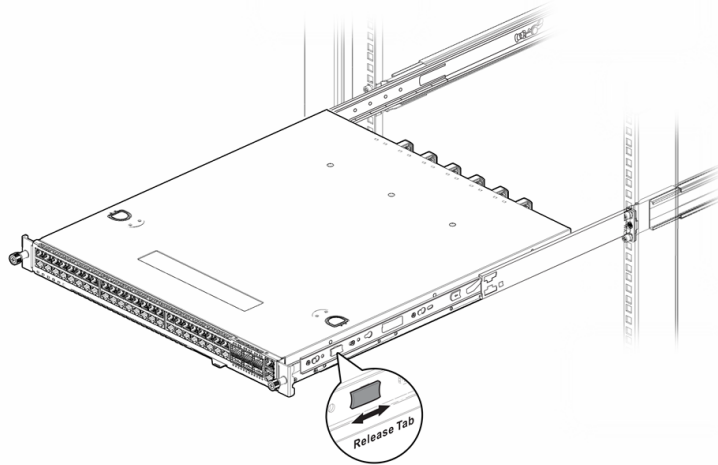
Pushing the Mounting Brackets into the Rail Assemblies
